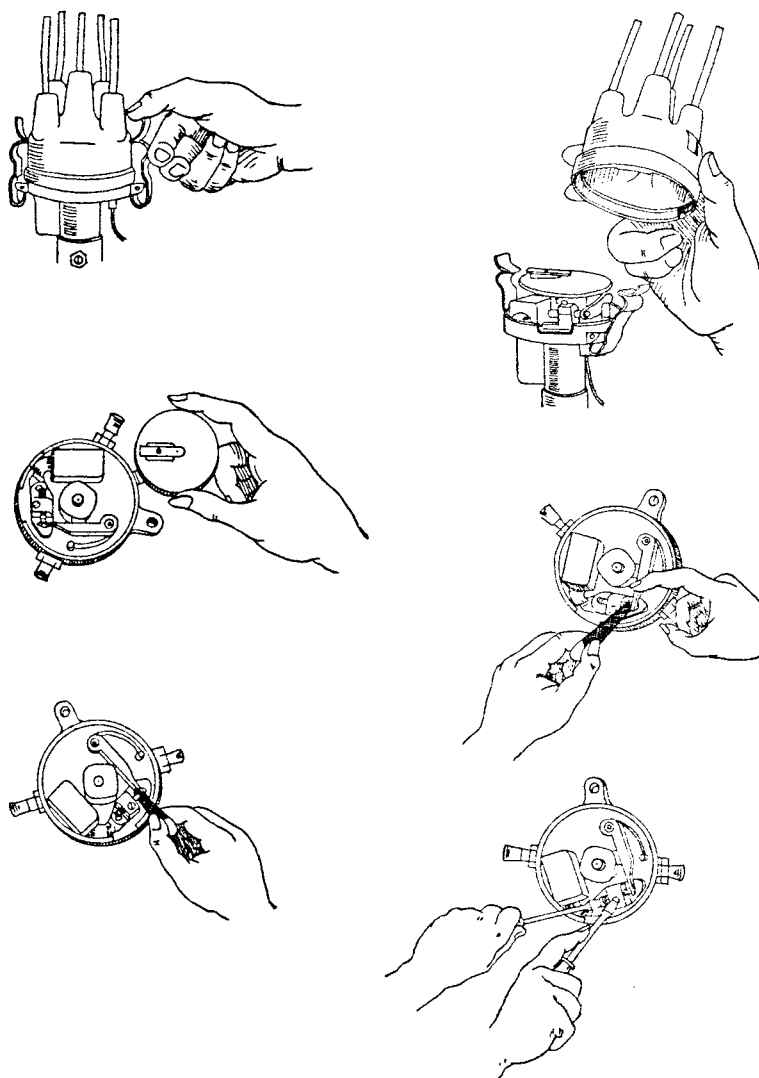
Distributor, Showing Head Removed; How to File and Adjust Contact Points
